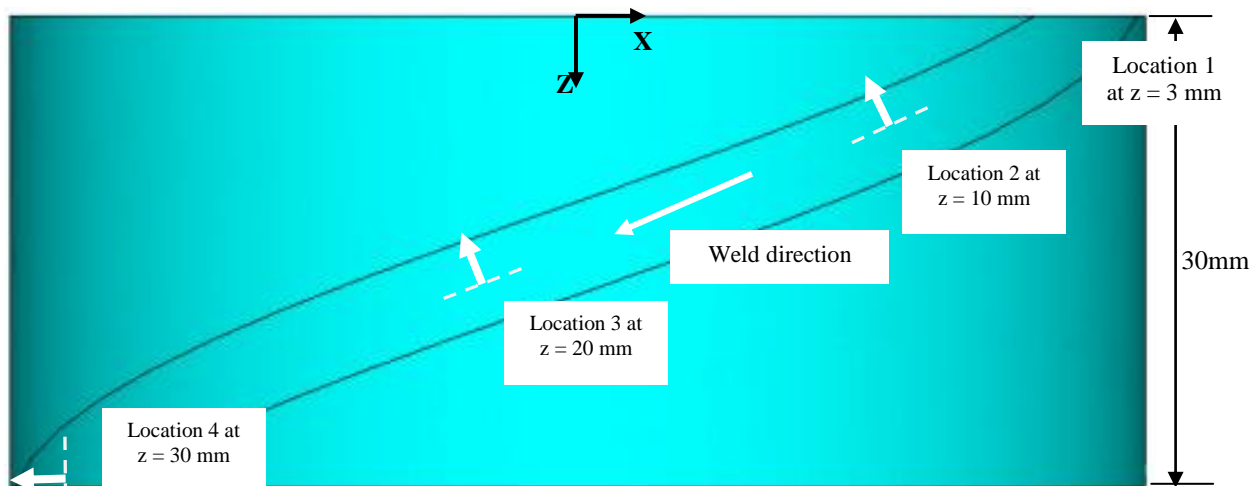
Schematic showing welding direction and distance measured across weld at four locations.
